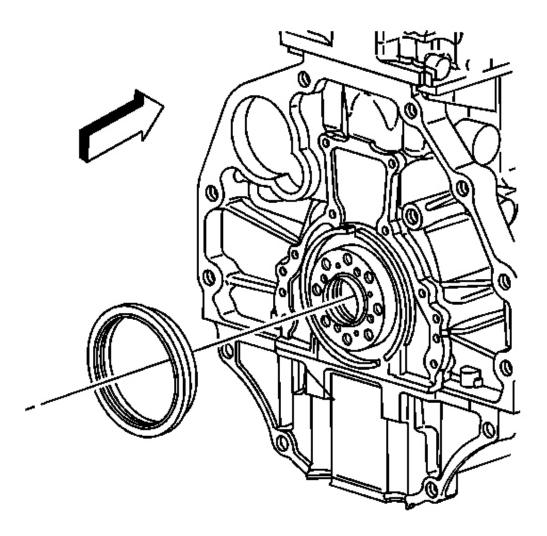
View Of Crankshaft Rear Oil Seal Housing & Seal Courtesy of GENERAL MOTORS CORP.
